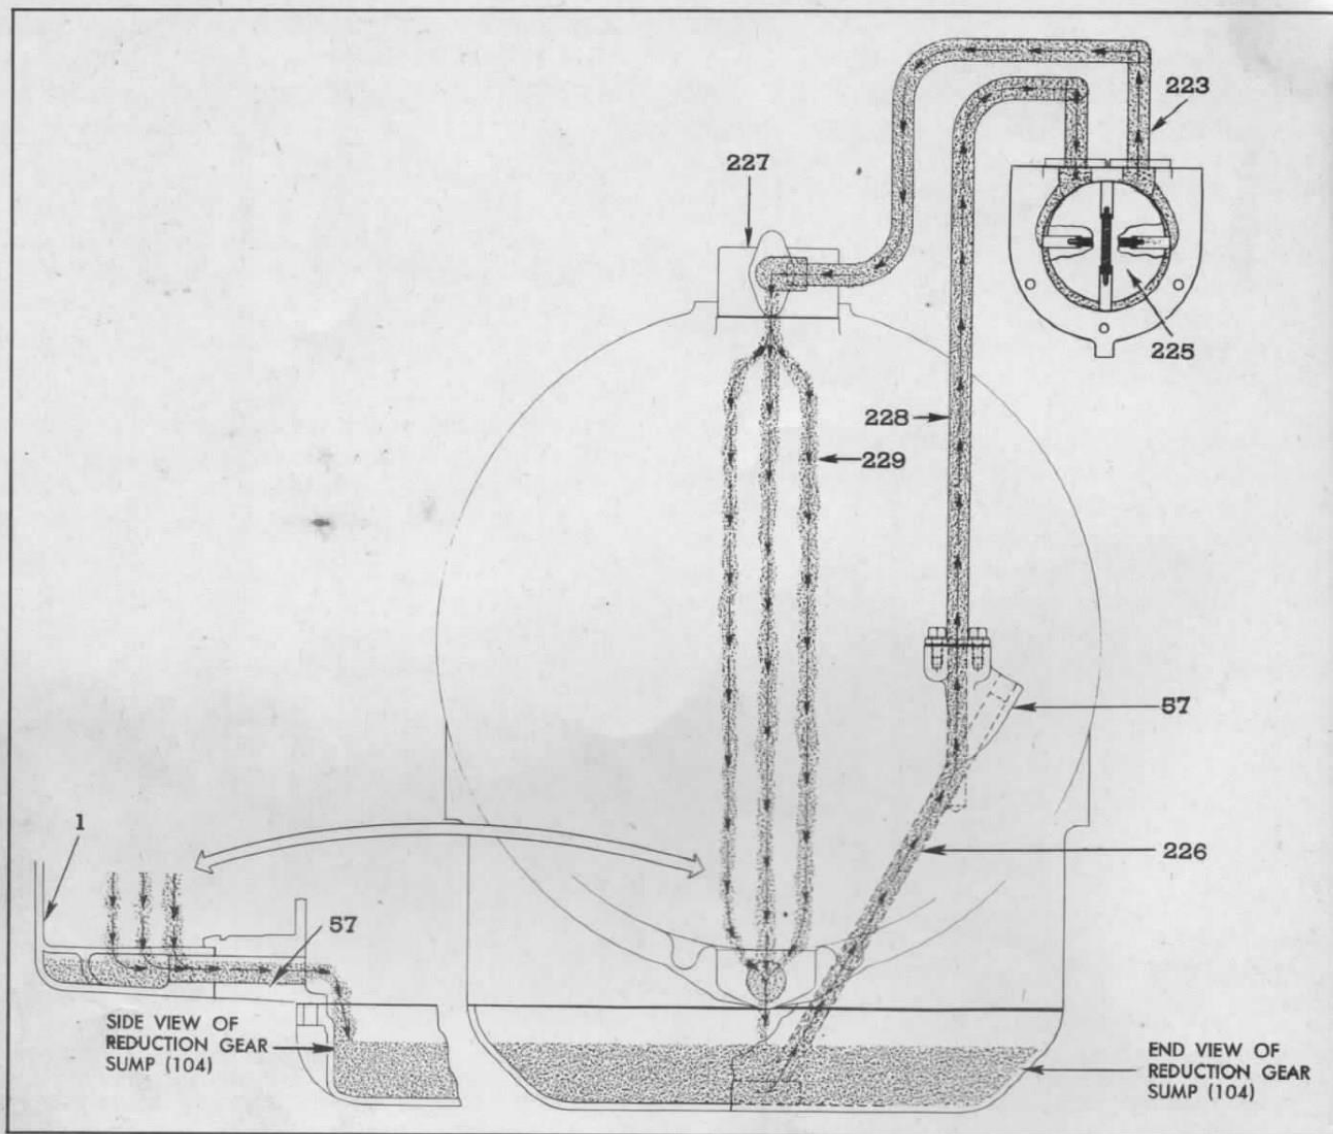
Oil Flow Diagram from Sump in Reduction Gear Through Pump and Control Valve and Return to Sump in Reduction Gear for Single Engine with Hydraulic Reverse and Reduction Gear
